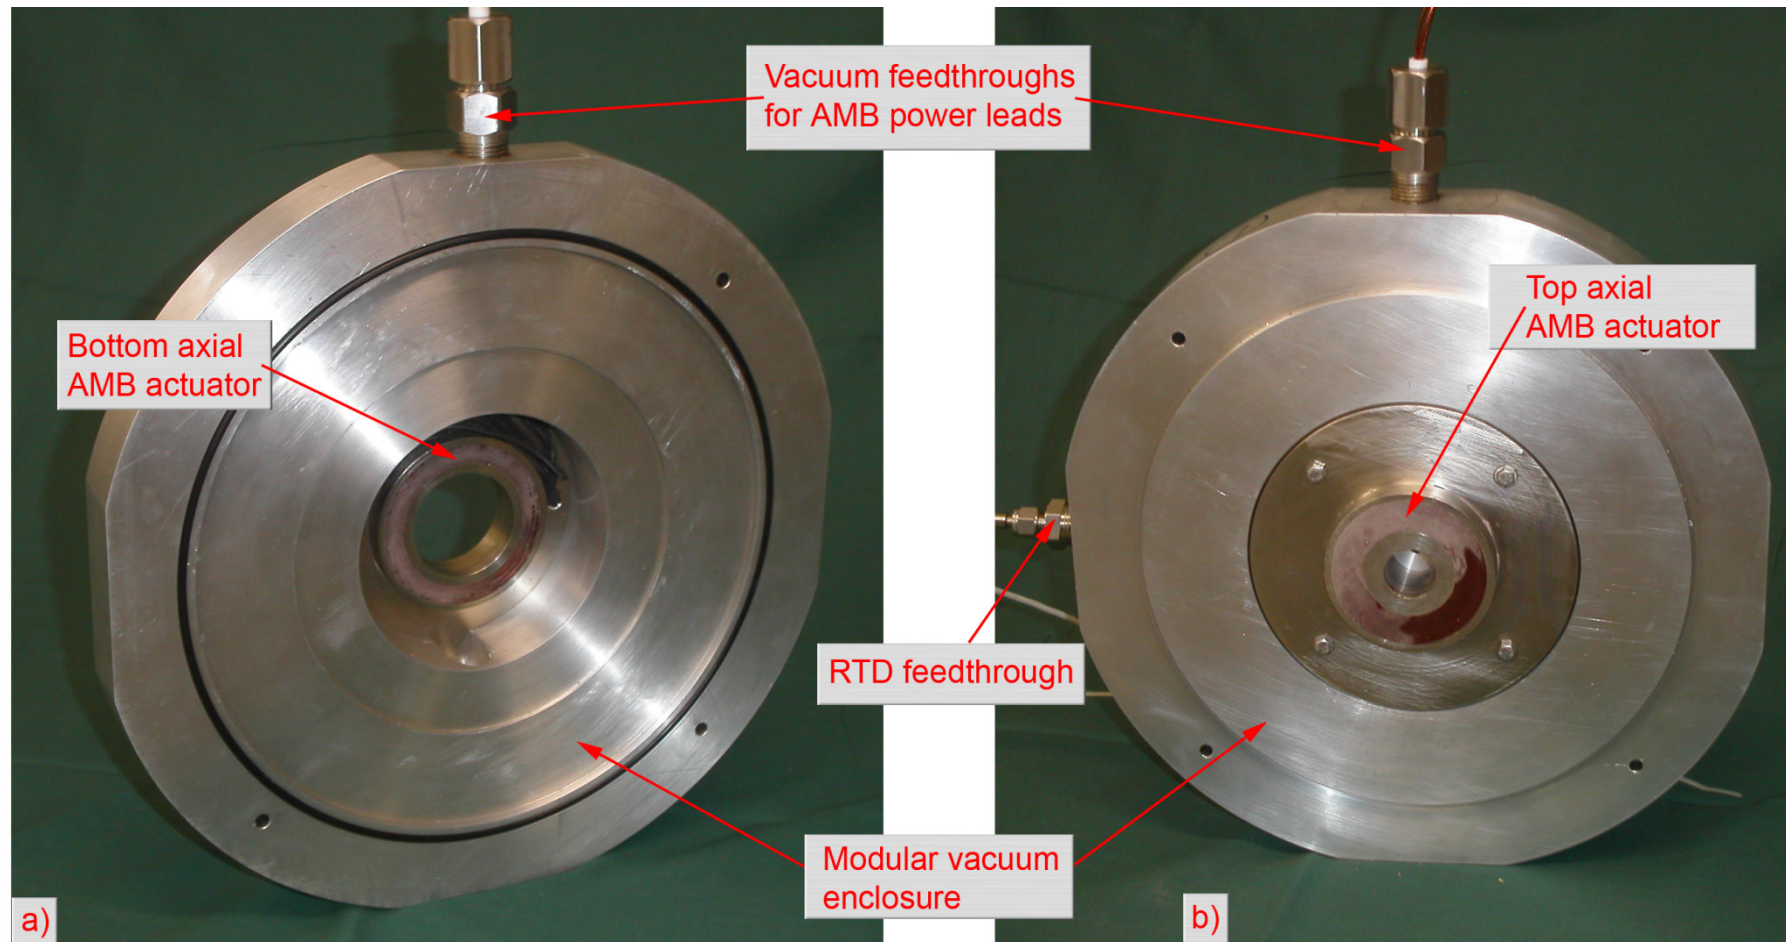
a) Bottom axial AMB actuator assembly b) Top axial AMB actuator assembly
